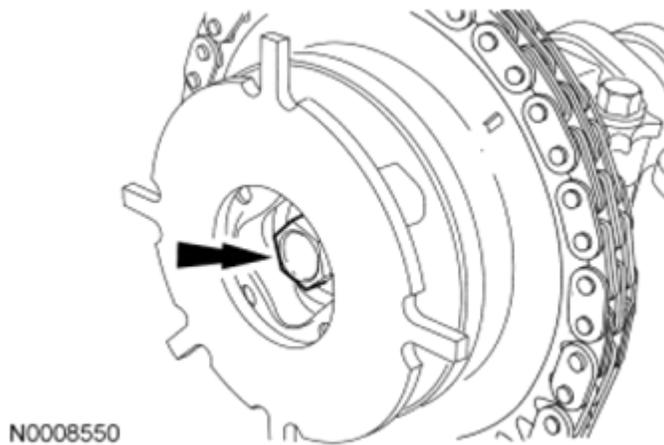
Locating Camshaft Phaser And Sprocket Assembly Bolt
